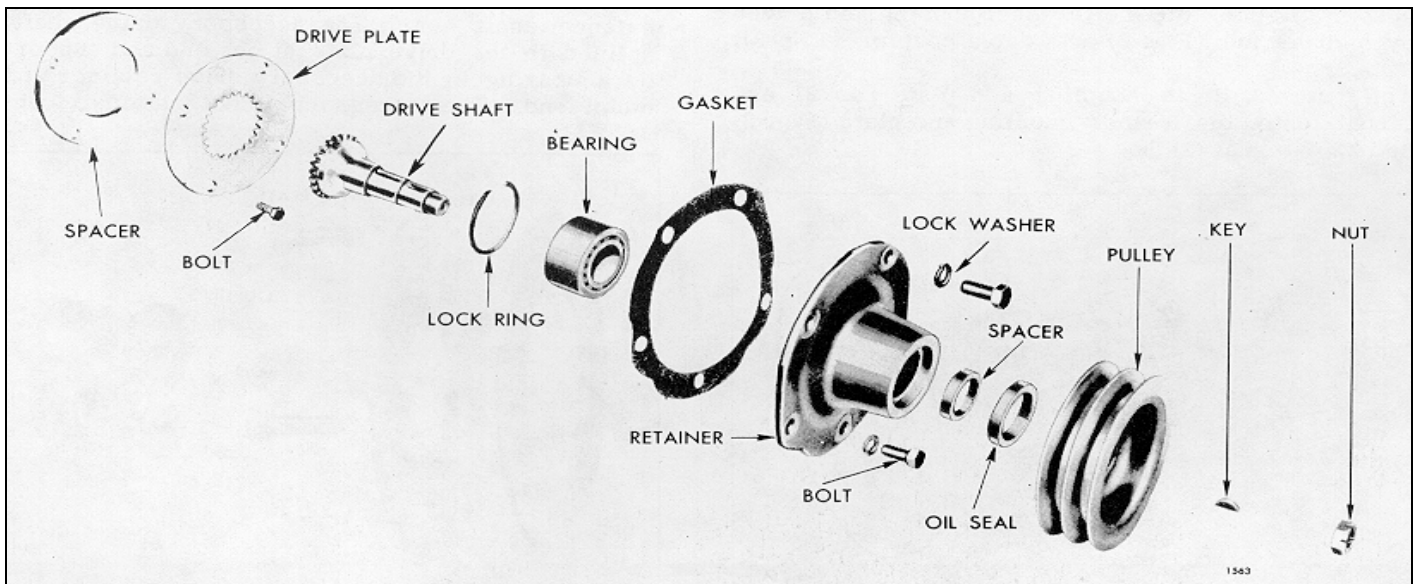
Components of Accessory Drive for Belt Driven Accessory (Drive Plate Type)
